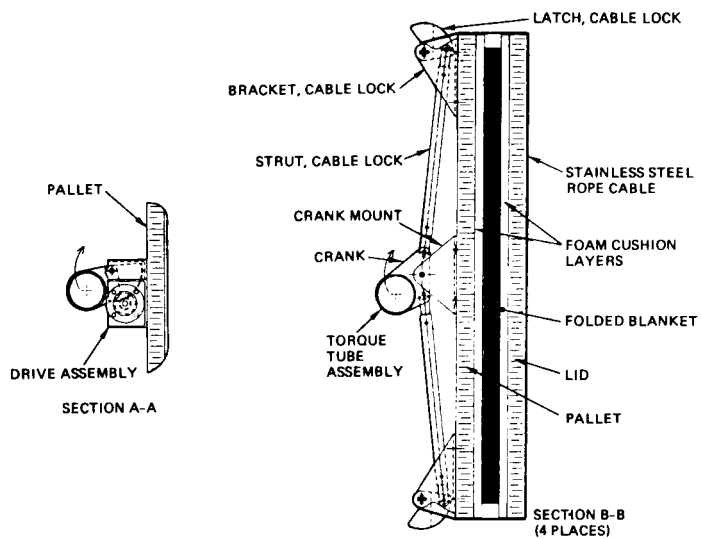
Stowed Blanket Preload/Release Mechanism (Cross-Sectional View)
